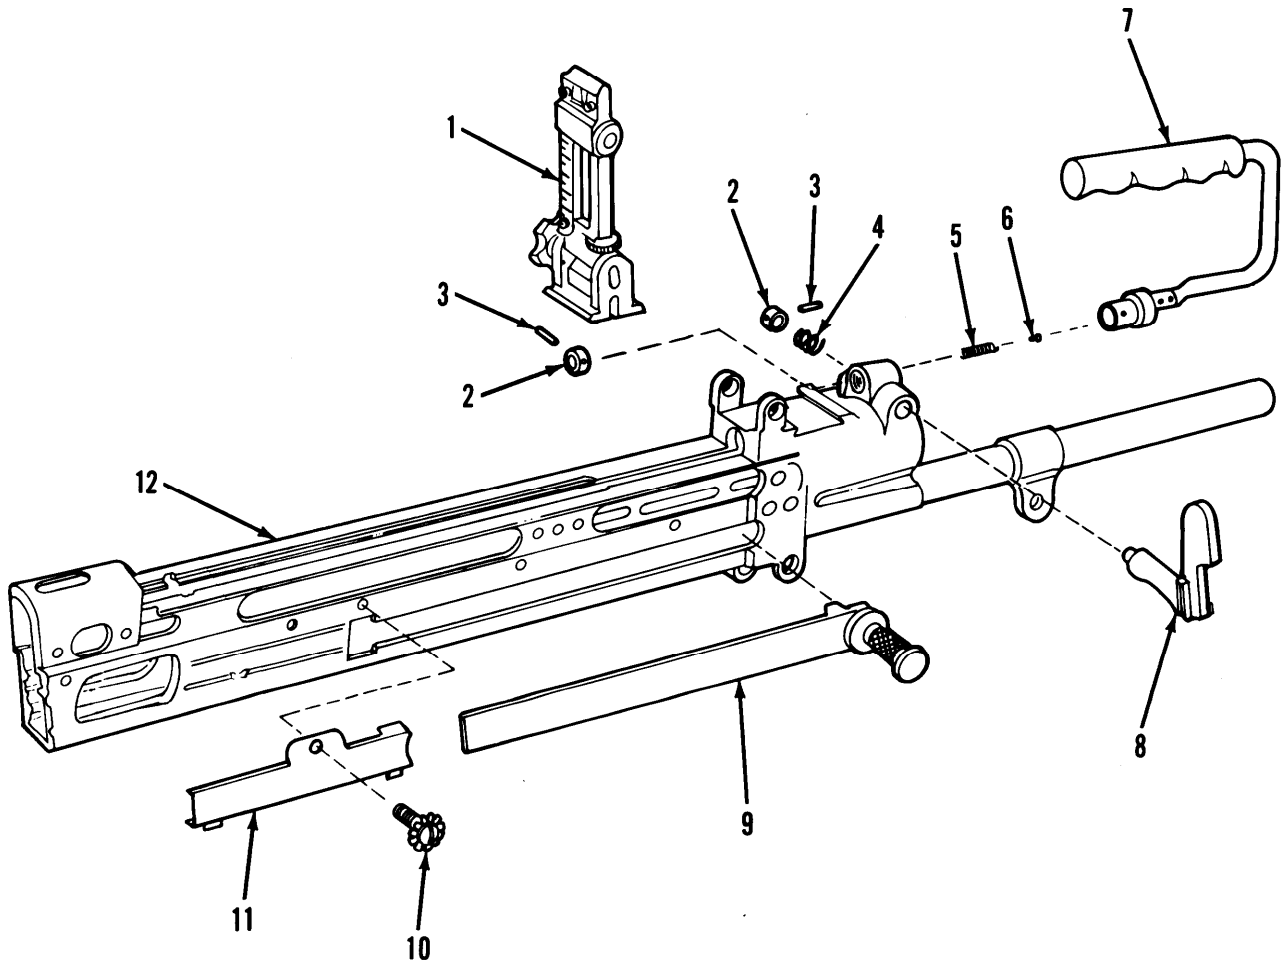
Machine gun, 7.62-mm M60 and M60D (M60 minor components).
